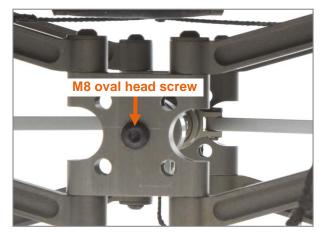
M8 oval head screw that connects the back central part of the folding mechanism with the central tube (wheelchair from behind)
